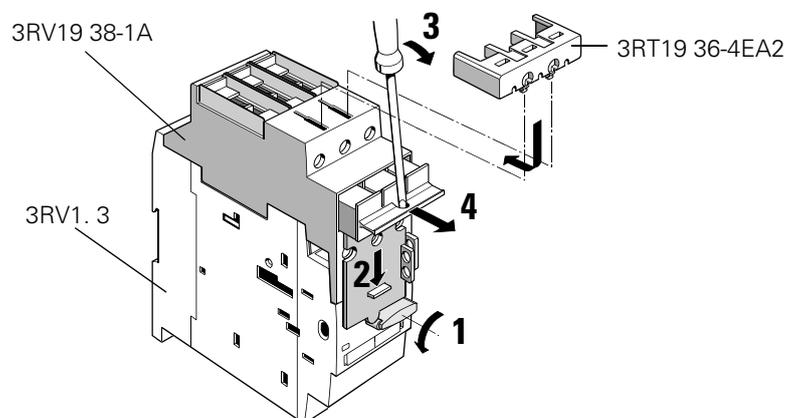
Locking the disconnecting module and mounting the cover (frame size S2)
